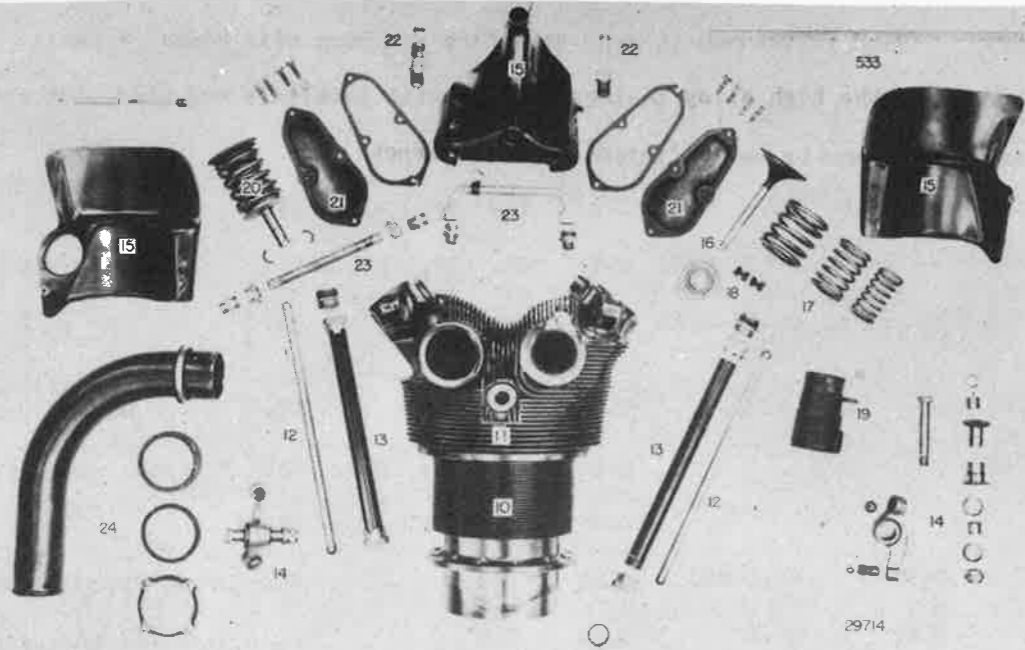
Disassembly of Valves and Rocker Arms from Cylinder Head and Barrel of Sakae-21 Aircraft Engine (CEB-2963). 30386
